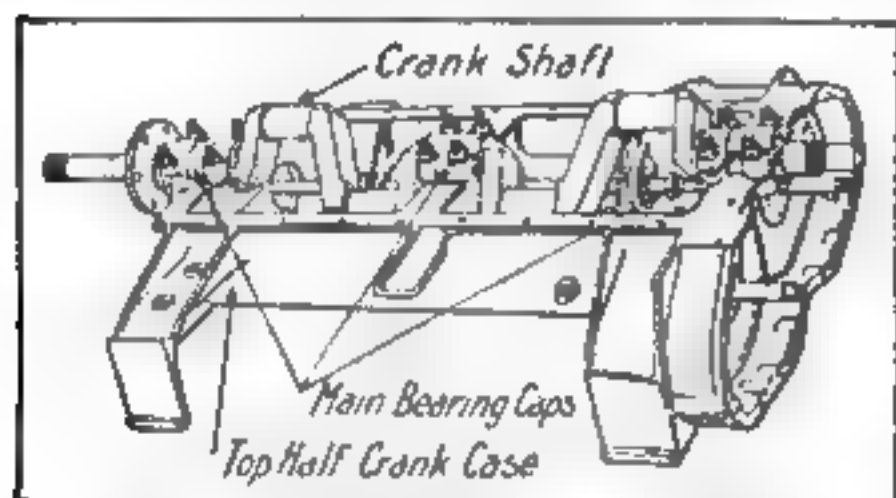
Top half of crankcase, showing method of crankshaft retention by three main bearing caps
